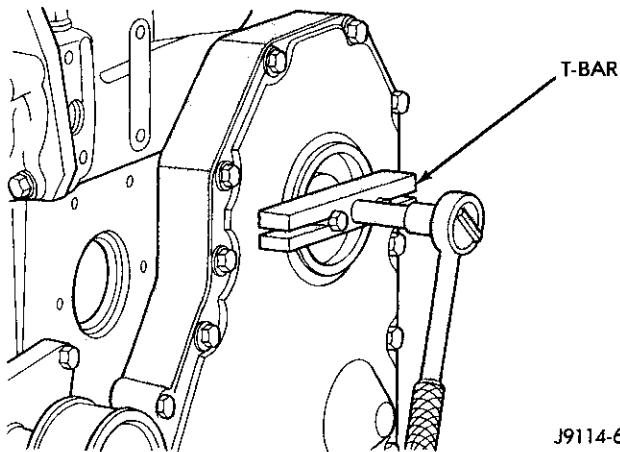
Separating Injection Pump Gear from Pump Shaft
